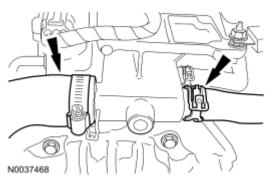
Locating Upper Radiator And Heater Hoses Courtesy of FORD MOTOR CO.
